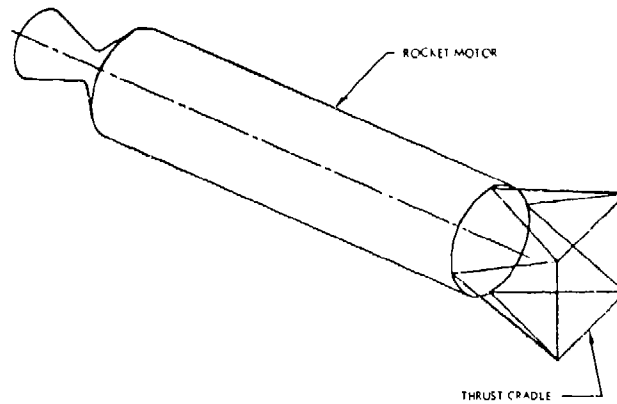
Diagram of Rocket Engine and Thrust Cradle
